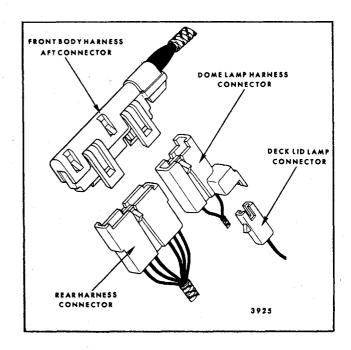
Front Body Harness - Aft Connector - F Style Shown
